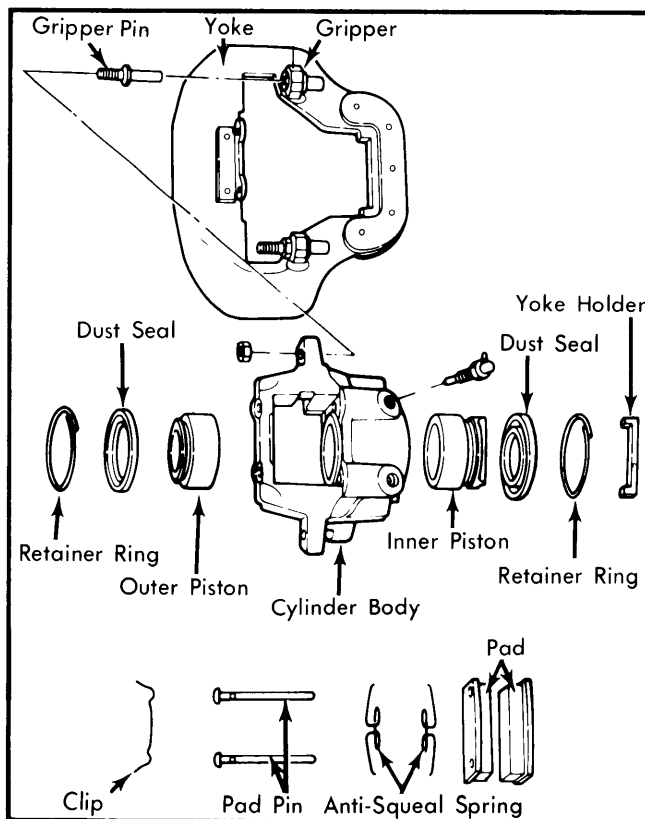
Exploded View of Datsun 510 Front Disc Brake Assembly
